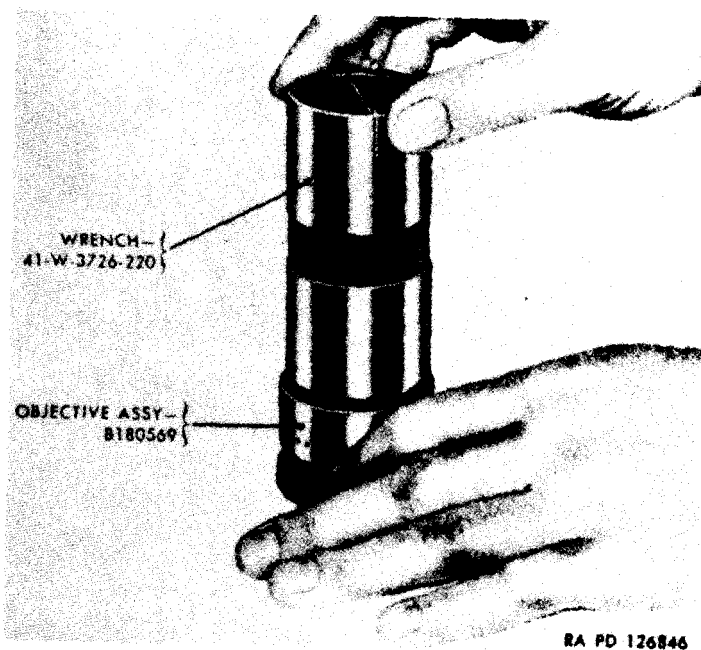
Using tubular wrench 41-W-3726-220 to remove objective retaining ring A316672.
